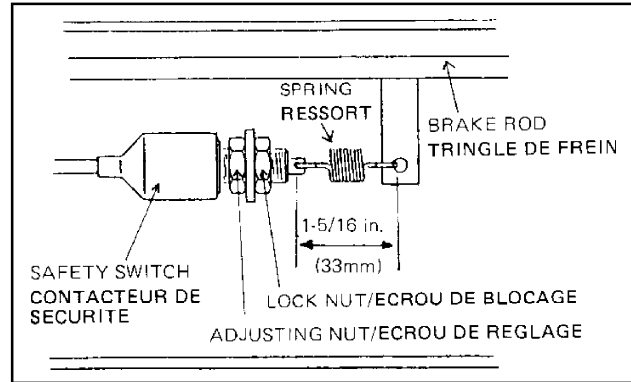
Safety Switch Adjustment for Brake Pedal.
